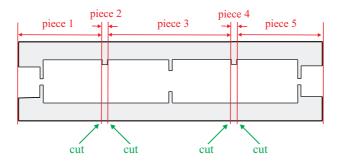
Side cut of the manufactured CWDM filter structure divided into 5 pieces.
